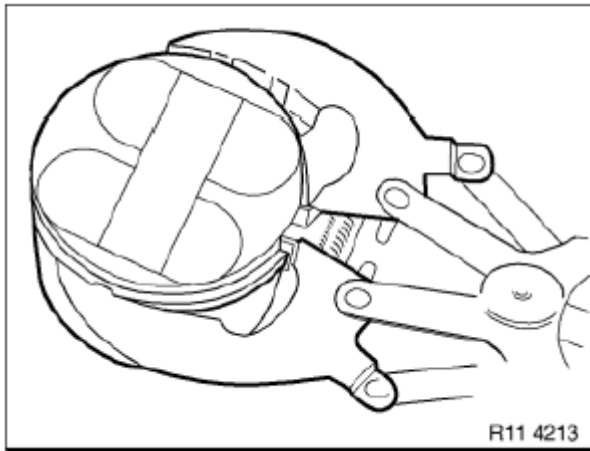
Identifying Compression Ring With Piston Ring Pliers
